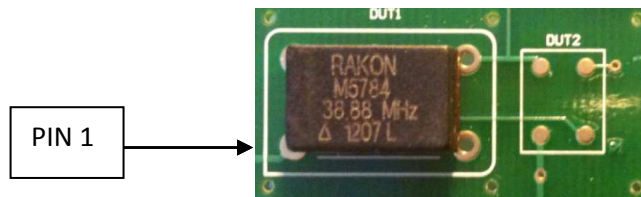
Draft Cover packaged DEVICE UNDER TEST
